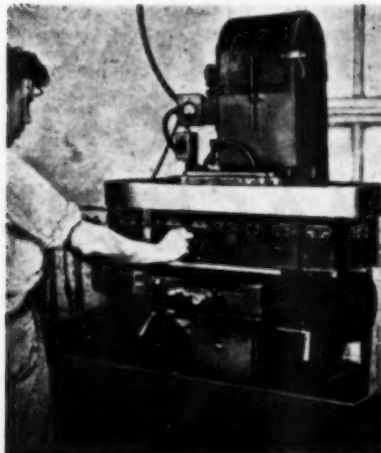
An automatic work-handling fixture provided with 21 chain-driven work-carriers.
